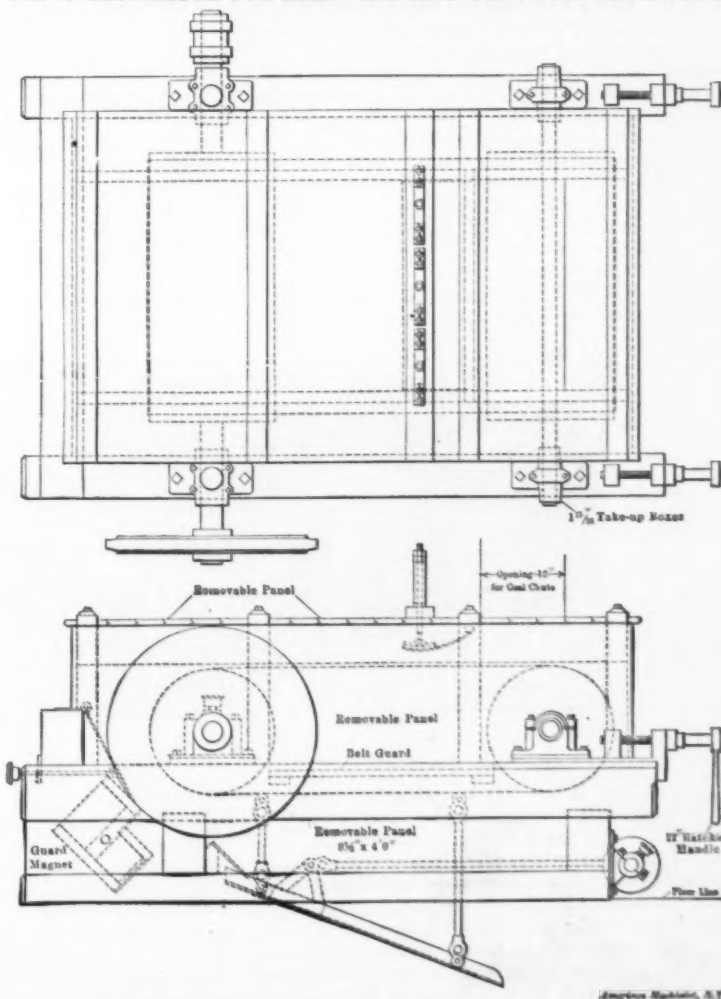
DETAILS OF SEPARATOR FOR REMOVING IRON FROM COAL.
